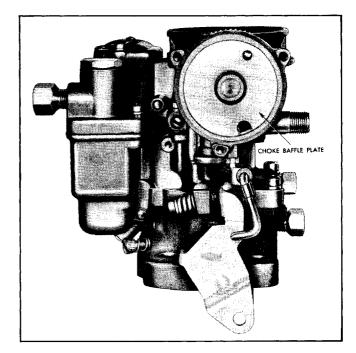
B-38 Choke Baffle Plate Installed-Carter
